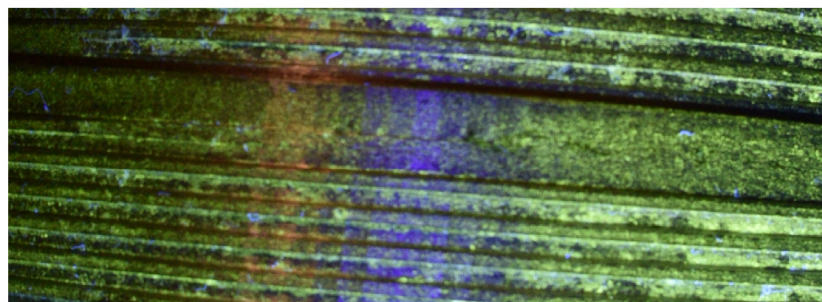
Ultraviolet Magnetic Particle Inspection of Threads
